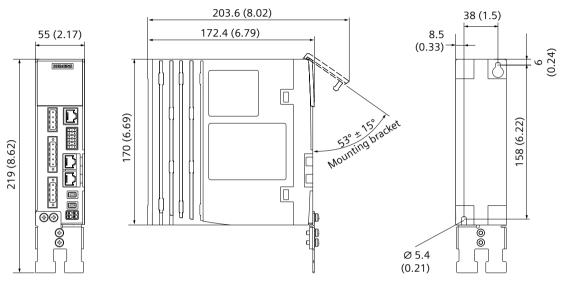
Dimension drawing SINAMICS S210 FSB, 1 AC, dimensions in mm (inch)
